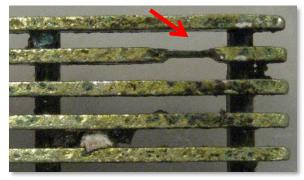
Mechanical damage to 70-30 Cu-Ni wedge wire screen top right corner
